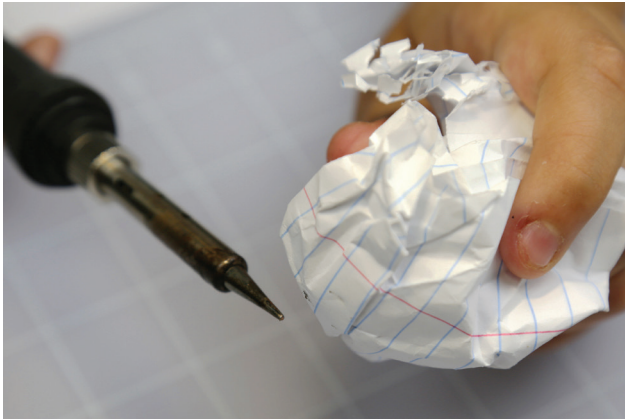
One way to clean the tip of a soldering iron. Move the crumpled paper quickly to avoid charring it.
